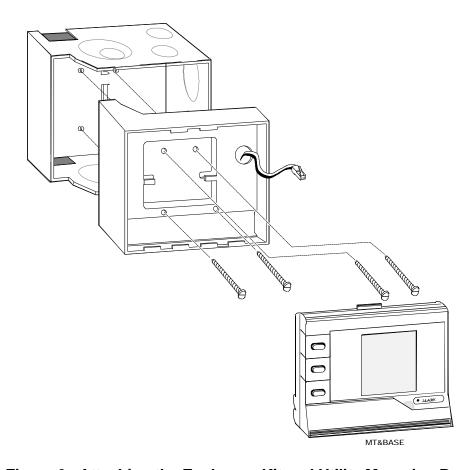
Attaching the Enclosure Kit and Utility Mounting Base
